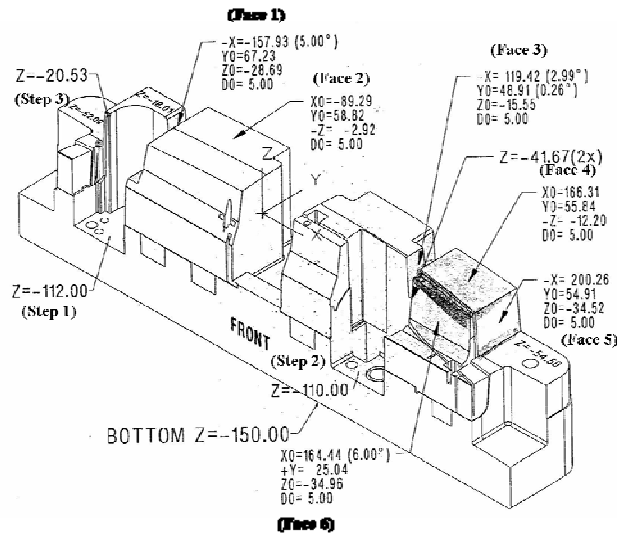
Sub-Core of Injection Mould Assembly 4525 (2 pieces)
